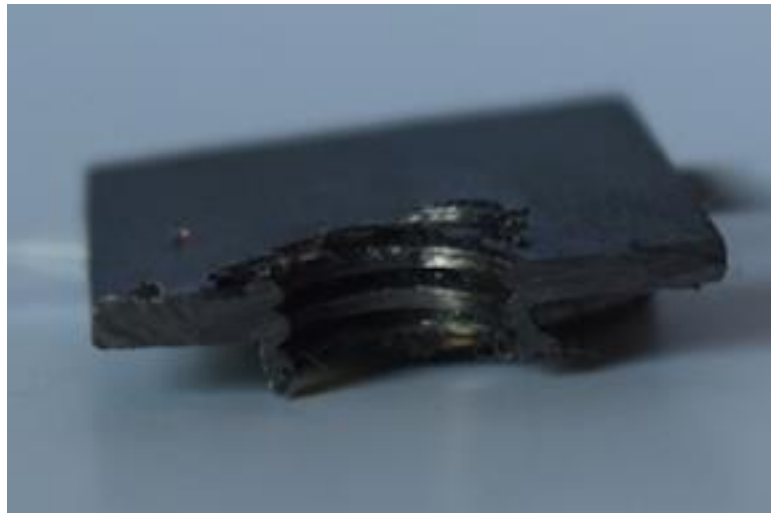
Cross-sectional view of DC06 steel after tightening
